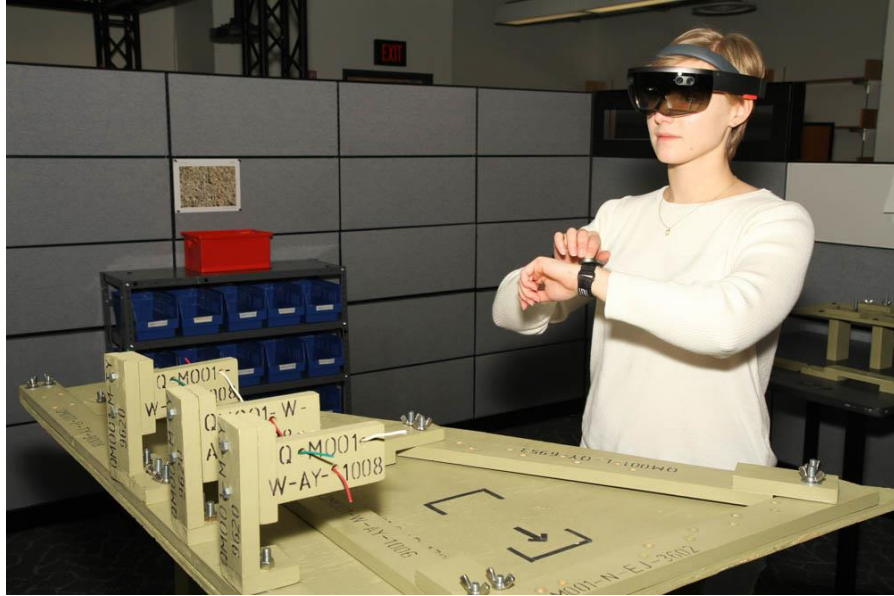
HoloLens HMD with Bluetooth clicker and completed mock wing assembly.
